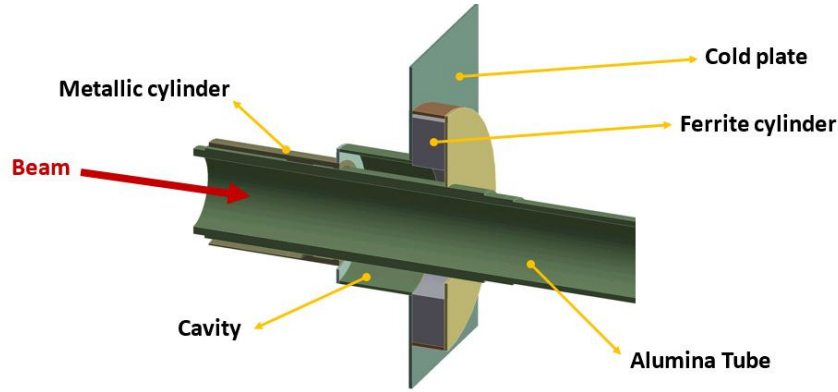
Cold plate pressed to the flat surface of the ferrite tube.
